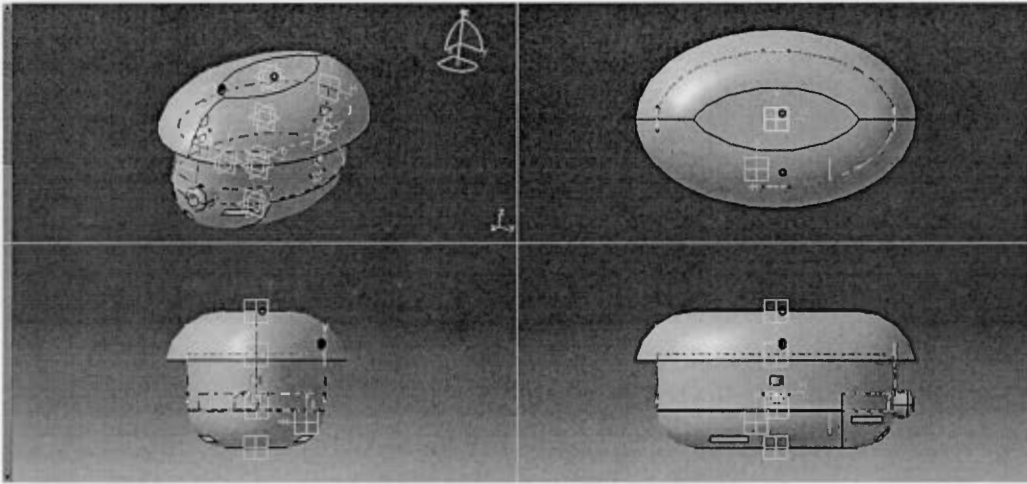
Modified PAS concept design middle part 4 side view
